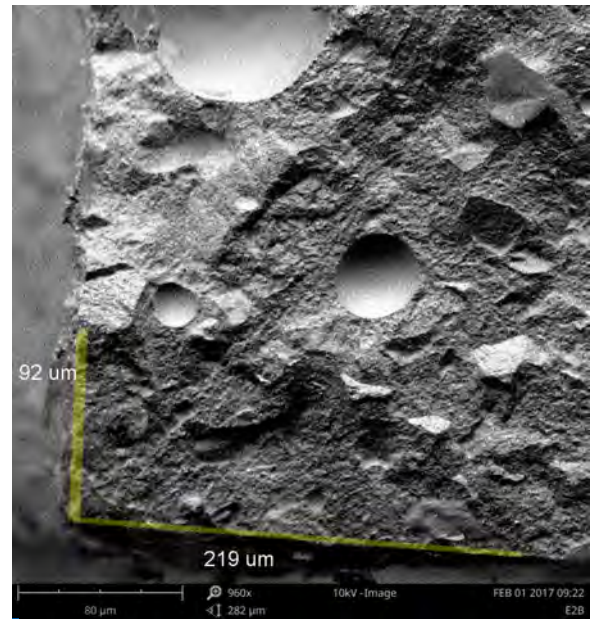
Example of a corner crack. The lines indicate the dimensions of the crack at the fracture origin.
